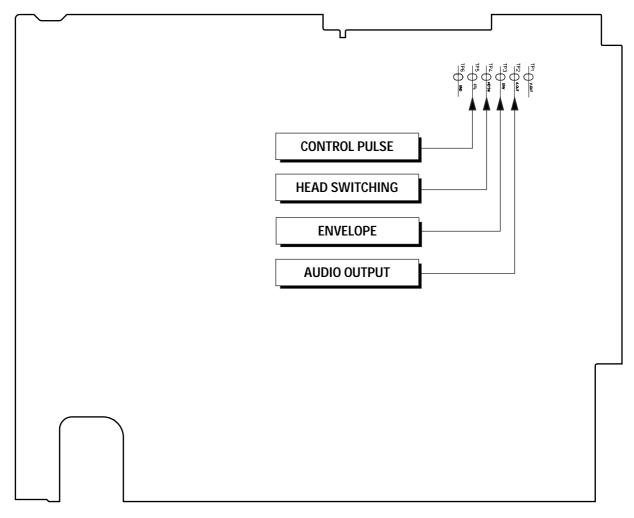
Location of Test point (VCR Main PCB-Top View)
